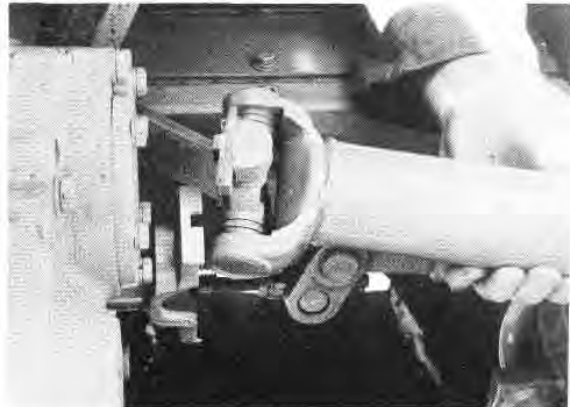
Main Drive Coupling Removal (Manual Model)
